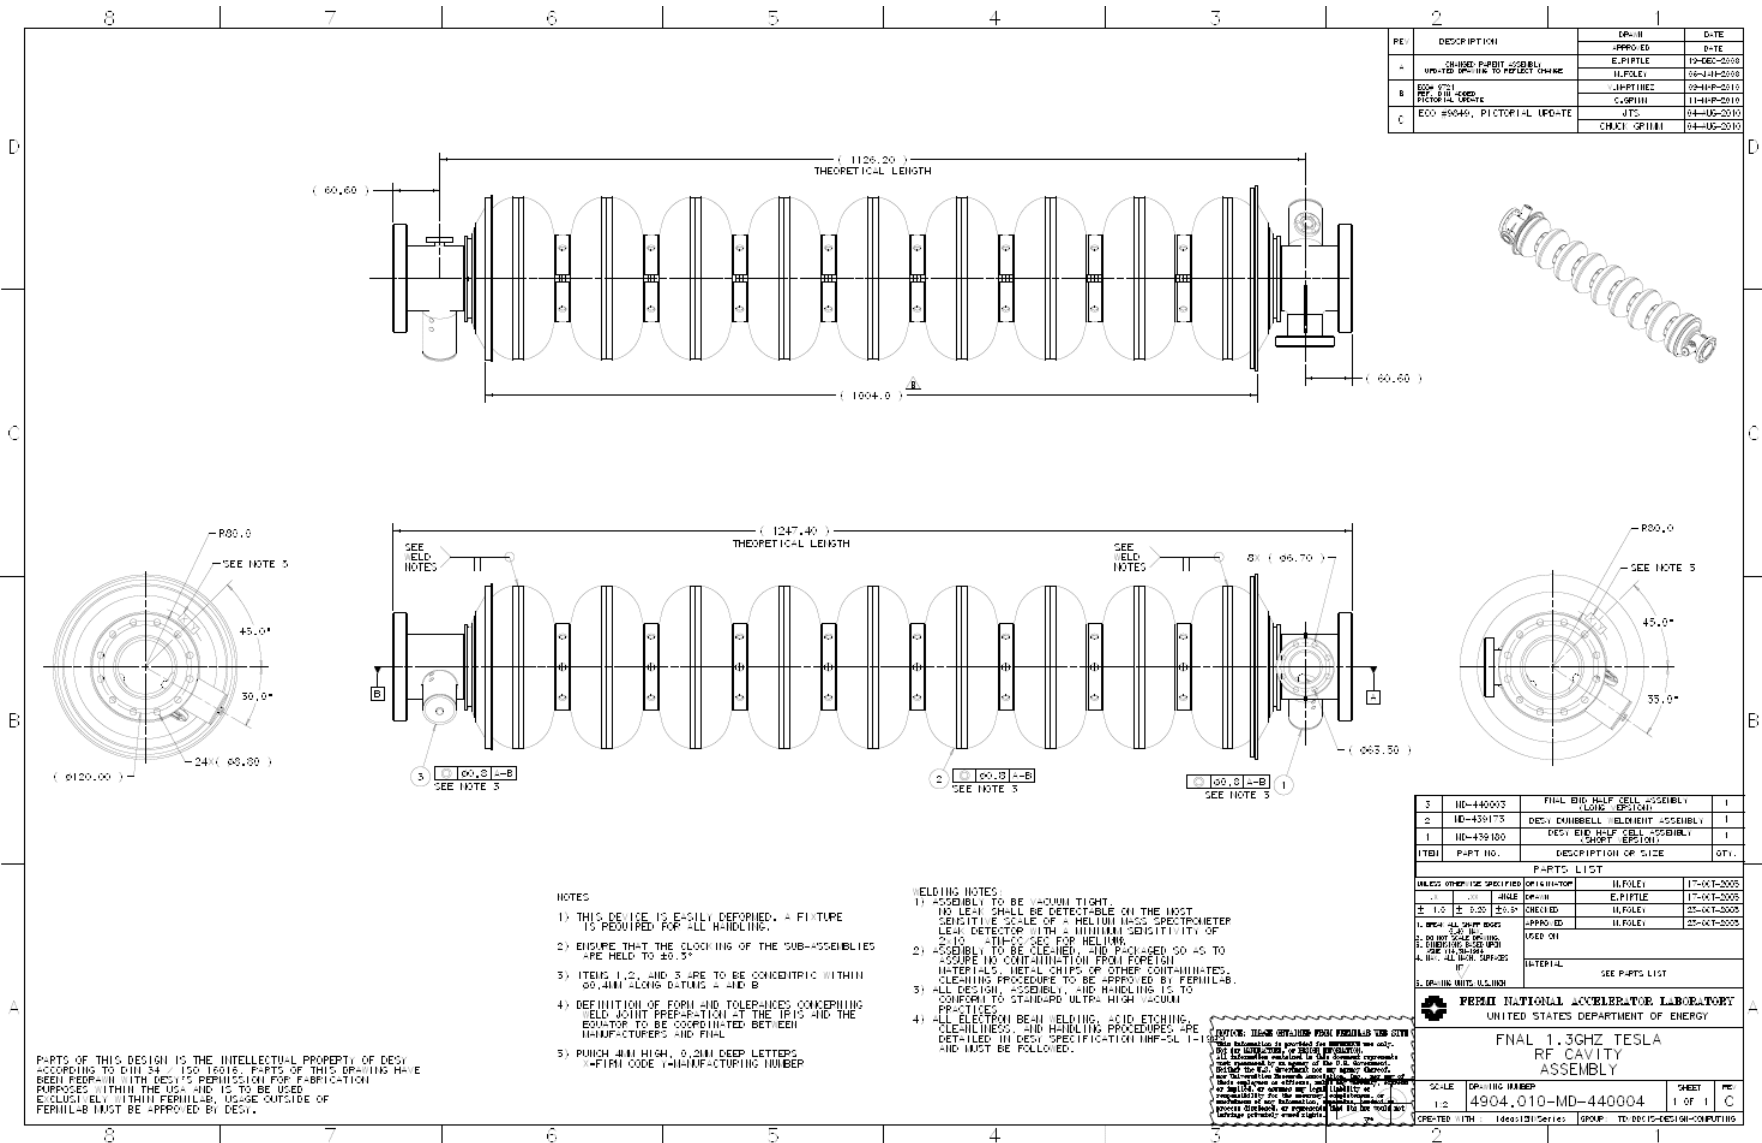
1.3-GHz Nine Cell RF Cavity Assembly (4904.010-MD-440004)
